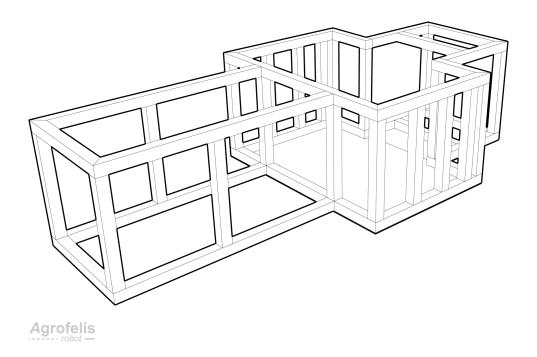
Manufacturing the frame step 3, fabricated bottom and top parts
